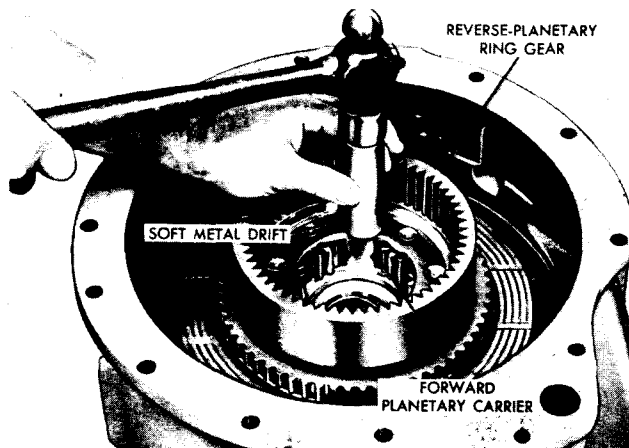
Installing forward planetary carrier assembly ^{S2448}
